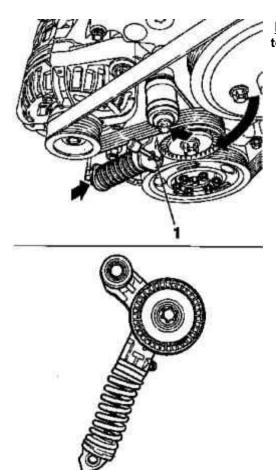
Removing Poly-V belt tensioner: 1 - special tool
